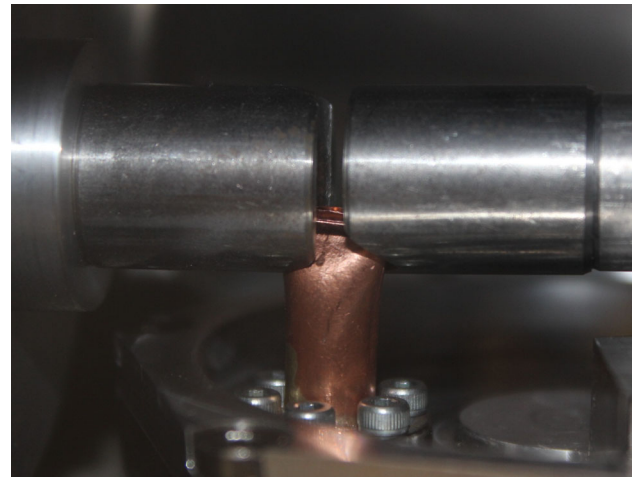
Clamp for opening the unpinned copper pipe that can be pushed together via an externally accessible handwheel to open the closure of the copper tube
